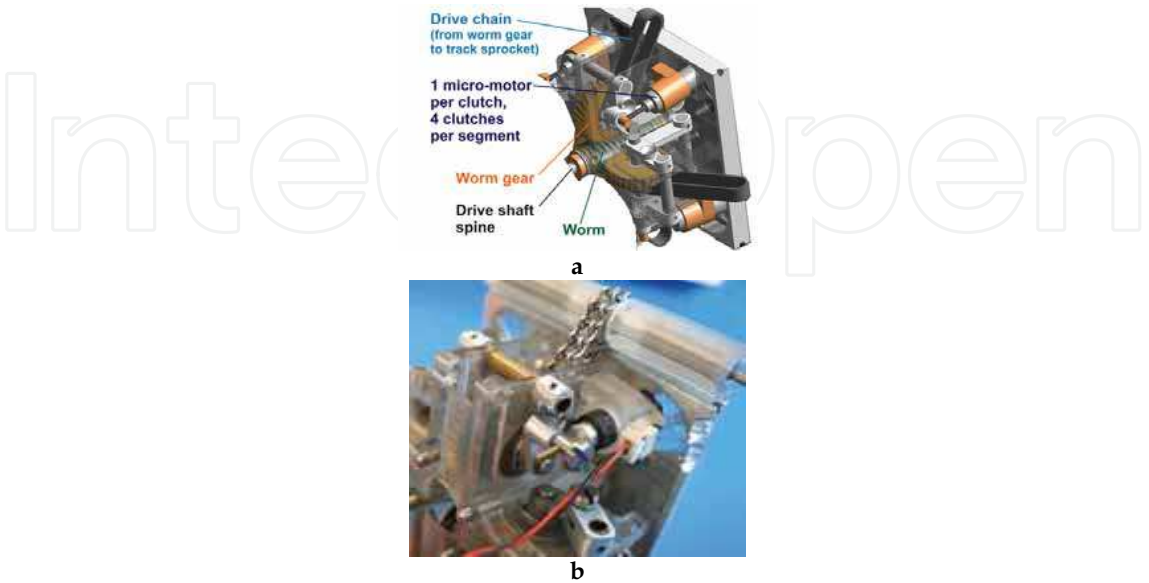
Gear box and micro-clutches. a – CAD drawing, b – photograph
